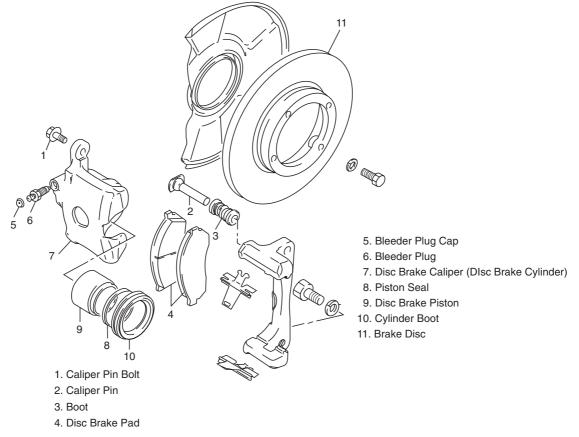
shows the component of this type of disc brake. It has no servo assistance as in drum braking and it is necessary to increase the working pressure of the piston and pad. For this purpose, the wheel cylinders have a large bore. Only a little change in clearance between the disc and pad has a large influence on the brake pedal stroke. It is necessary to have the clearance adjusted to minimum at all times, by means of the piston (rubber) seal.
